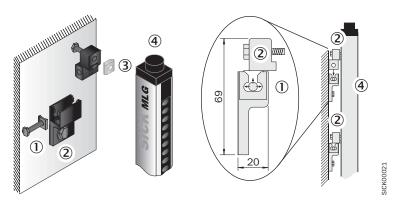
Mounting light grids with optional T-nuts and sliding nuts
